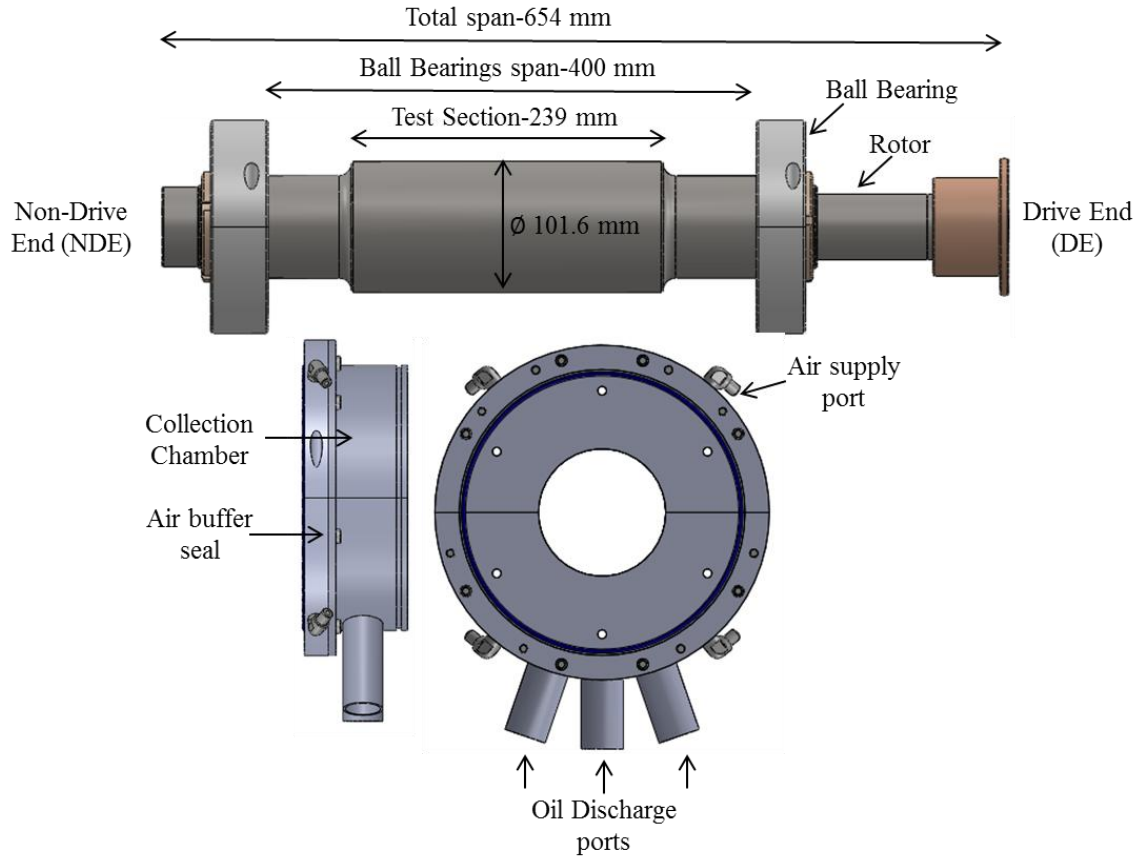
Schematic views of test shaft, ball bearings, air buffer seal, and collection chamber.
